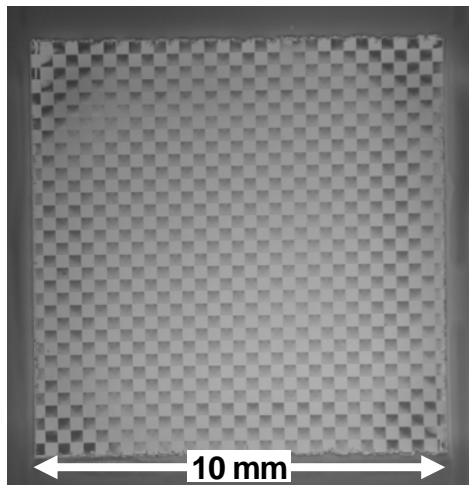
Checker pattern fabricated by UV-nanoimprint for initial resin thickness of 80 nm.
